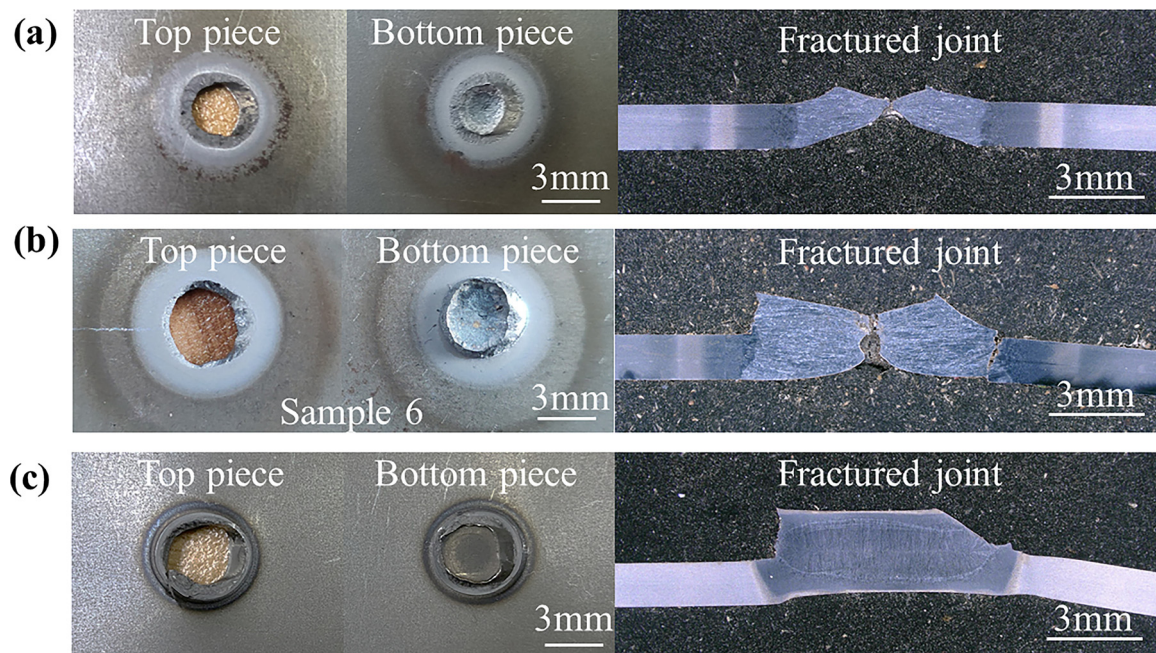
The fractured joints of the welds obtained by (a) conventional LSW process; (b) novel LSW process and (c) RSW process.
